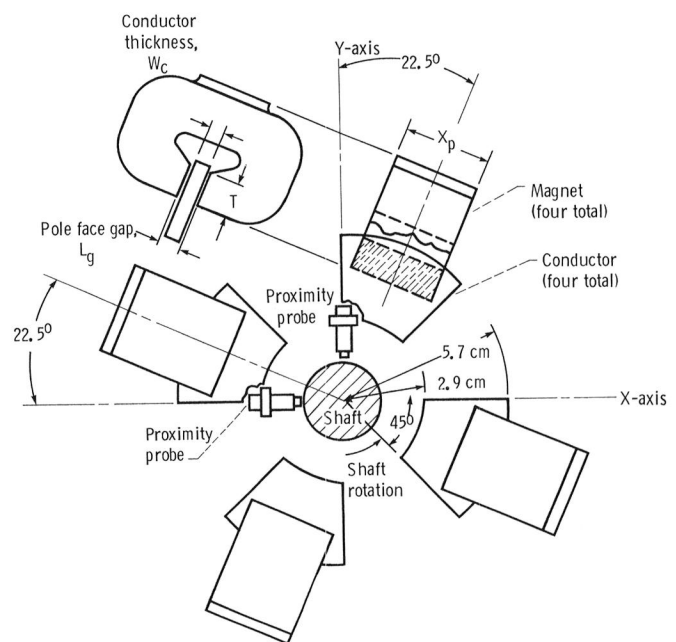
Plan view of the damper assembly and location of the proximity probes.
